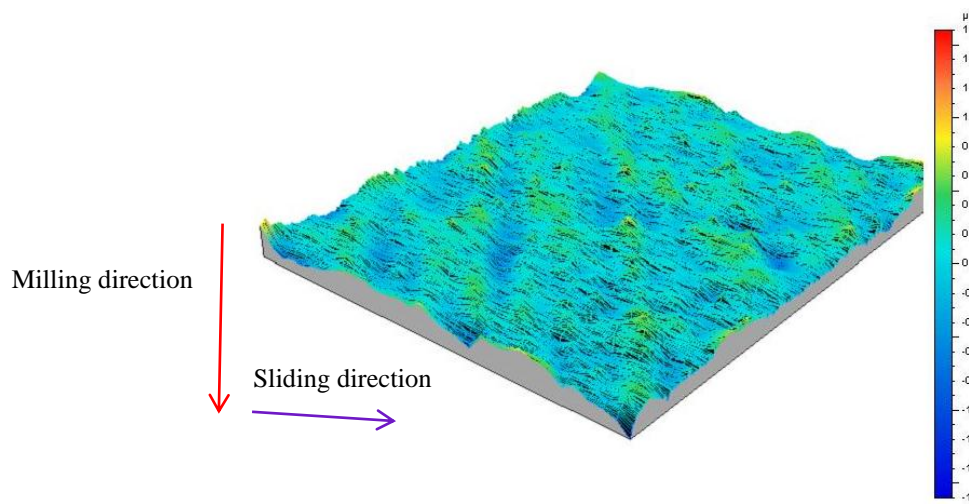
3D measurements of the gear flank after running-in test-set 3
